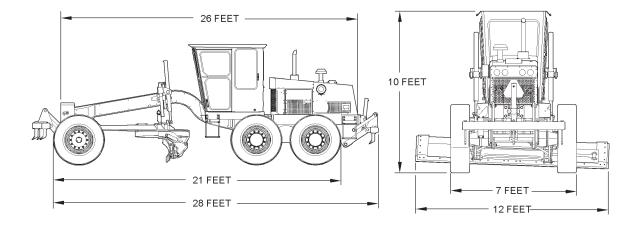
OUTLINE DIMENSIONAL DRAWING
